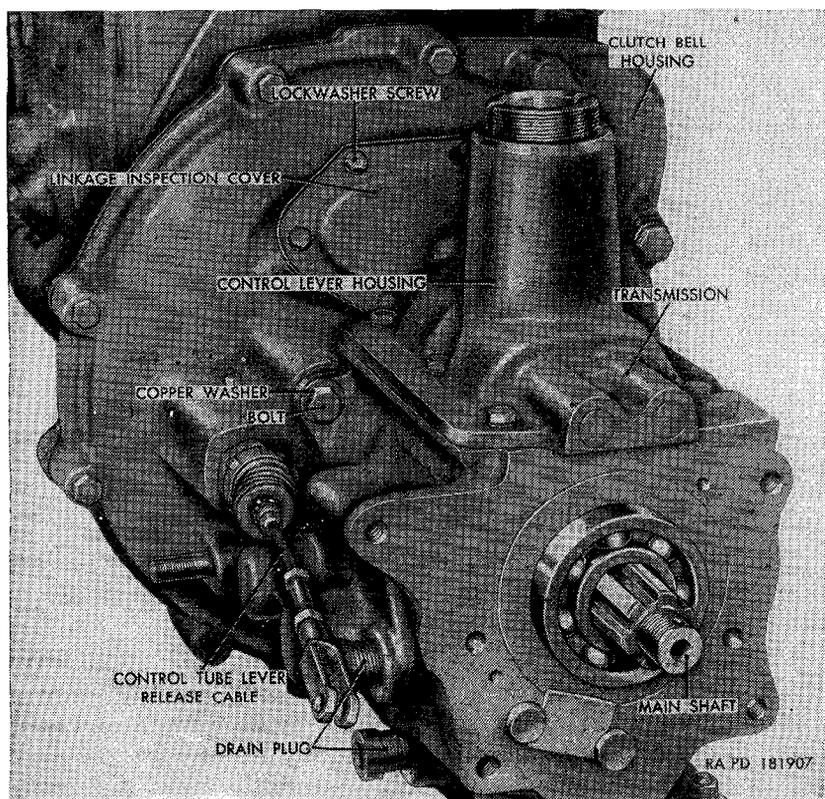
Transmission rear view, transfer removed—power plant removed from vehicle.
